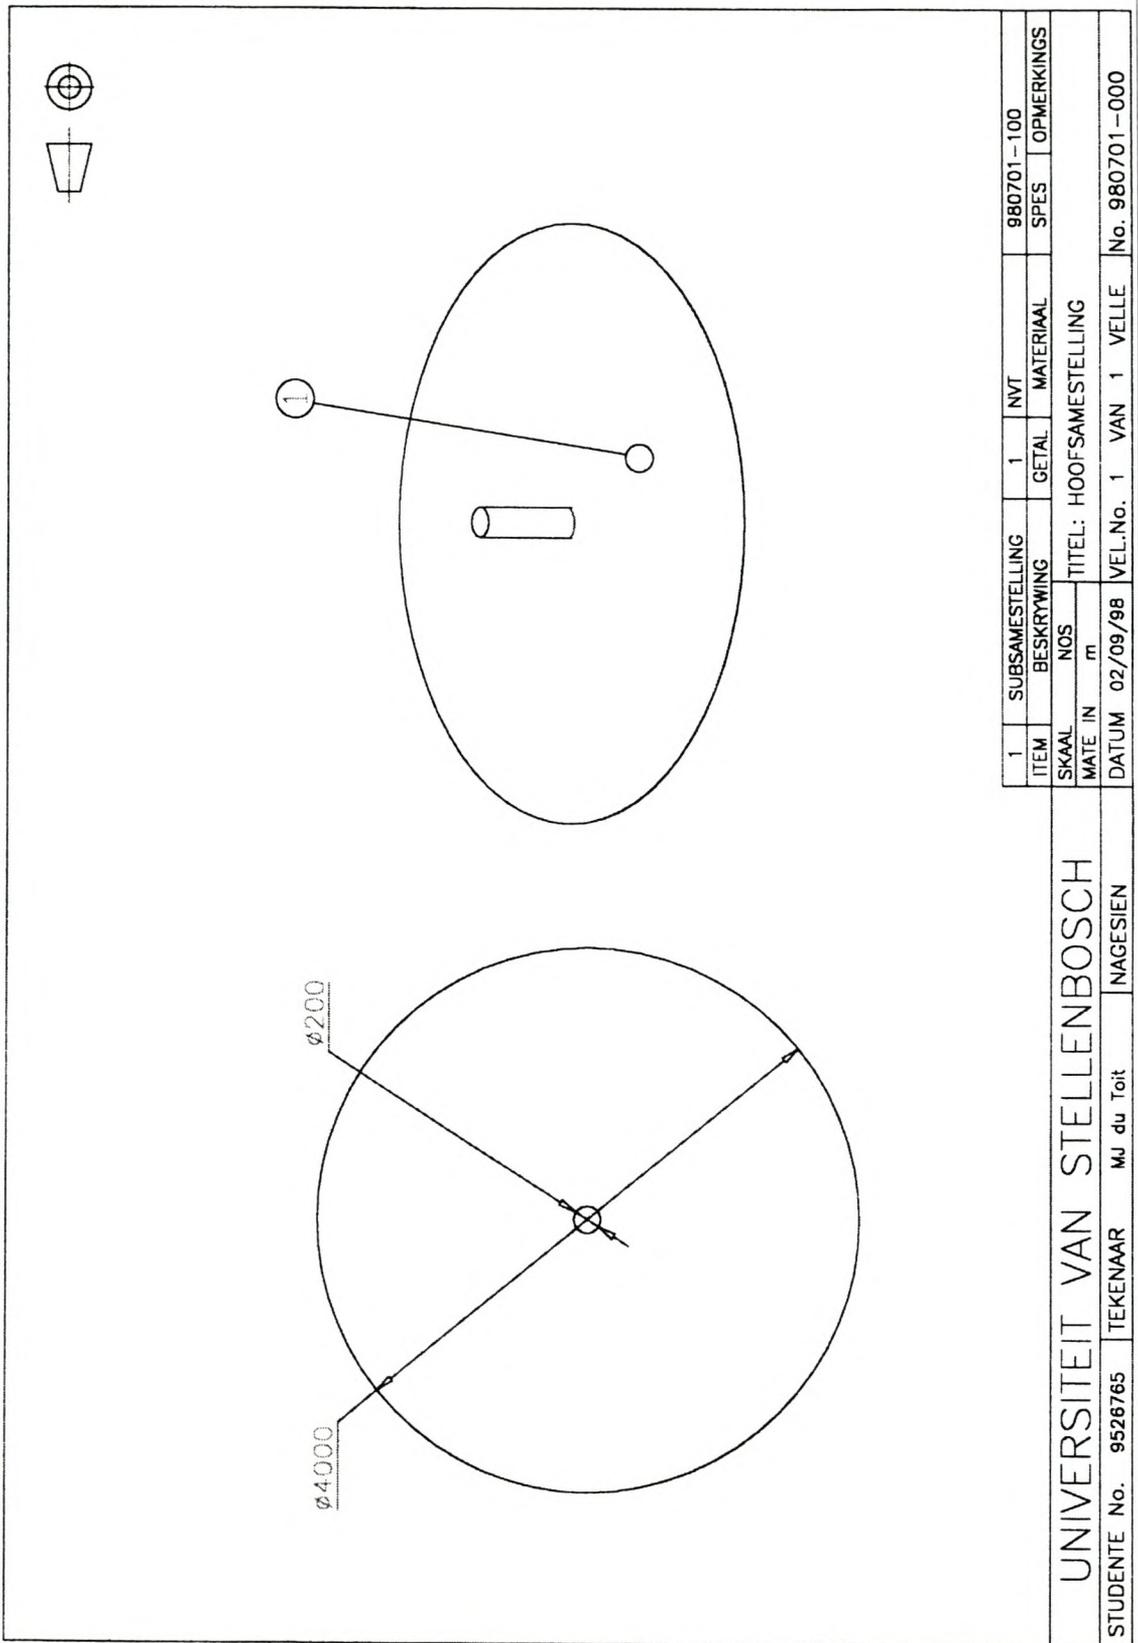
Solar Chimney Collector, Technical Drawing #1 [Roux et al., 1998]
